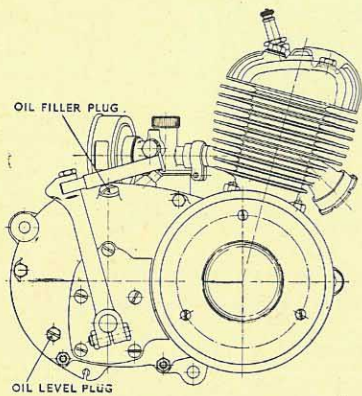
OIL FILLER AND OIL-LEVEL PLUGS MARK 1F UNIT.
